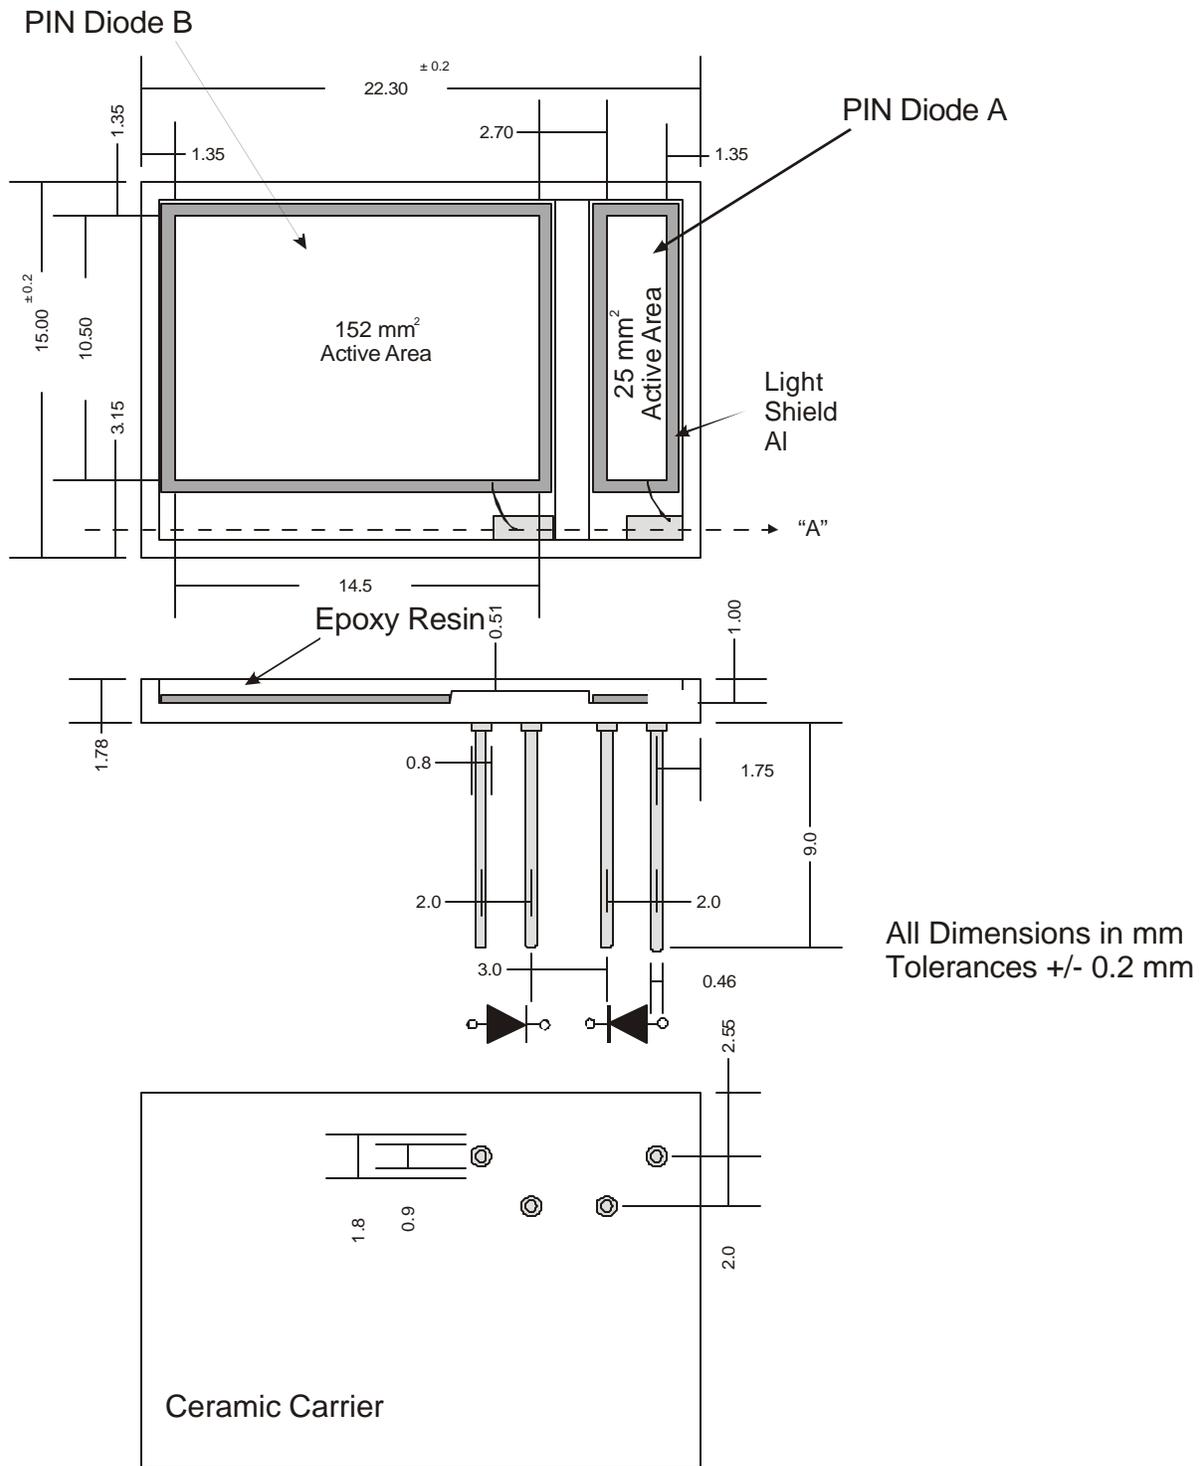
Pin Layout for the PIN Photodiode Assembly
